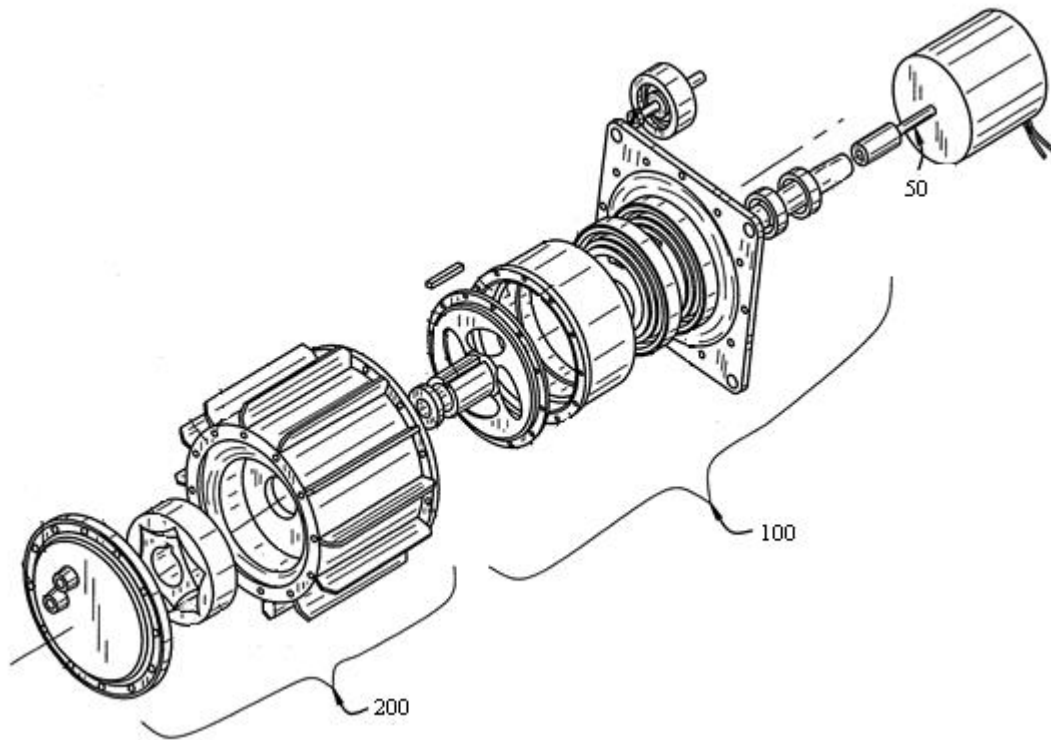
Integrated gear and pump: 50 – motor; 100 - speed reducer; 200 - gerotor pump
